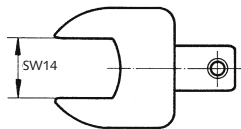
SW14 fork wrench insert for mounting and torque wrench Type 1300A71
